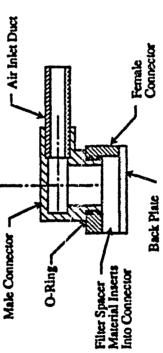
SNAP-FIT FILTER CONNECTOR ASSEMBLY
